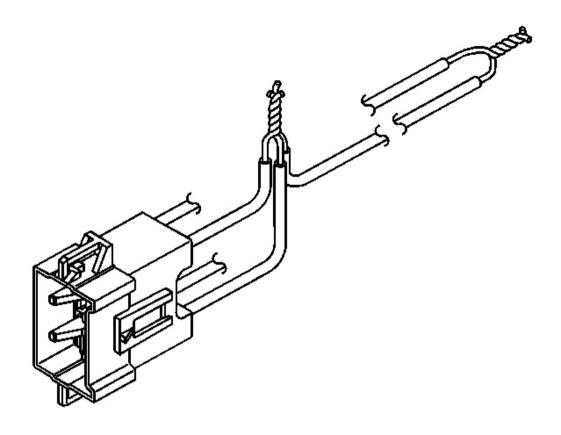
Twisting Connector Wire Leads (Low) To Deployment Harness Wire Courtesy of GENERAL MOTORS CORP.
